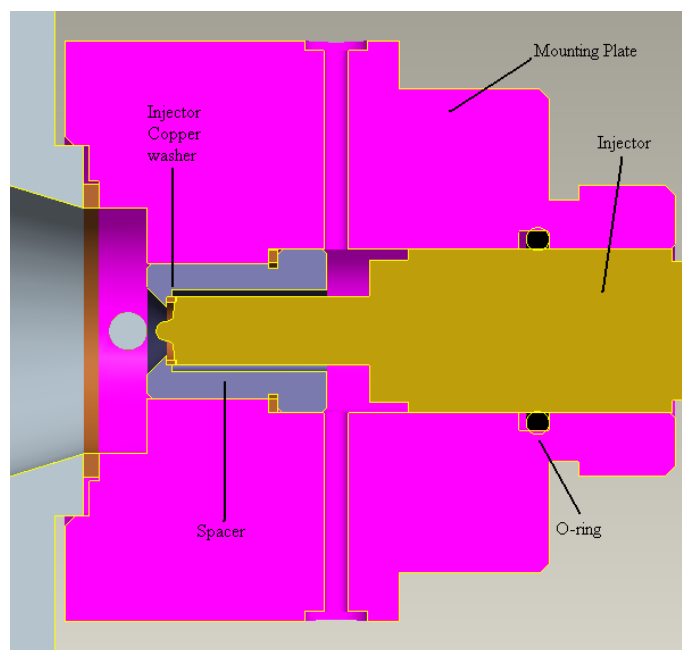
2nd injector mounting design. The housing depicted in Figure 4.2 was re-machined and threaded to incorporate the purple spacer indicated in this figure.
